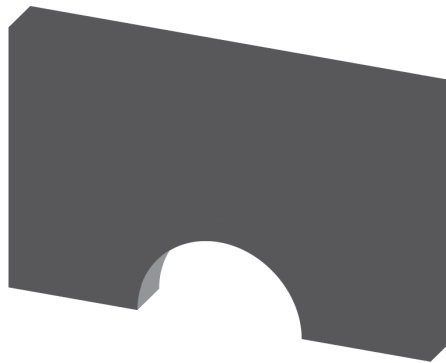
Wall shape shield. Tall to provide more blockage from the machine head.
